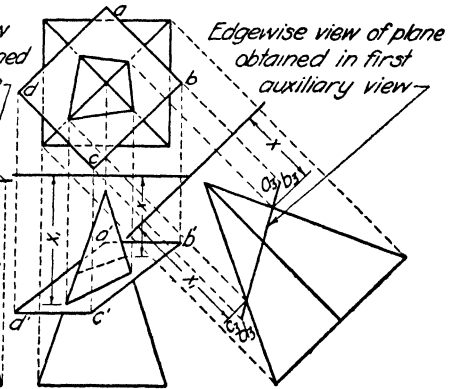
Auxiliary plane used to get edgewise view of plane.
